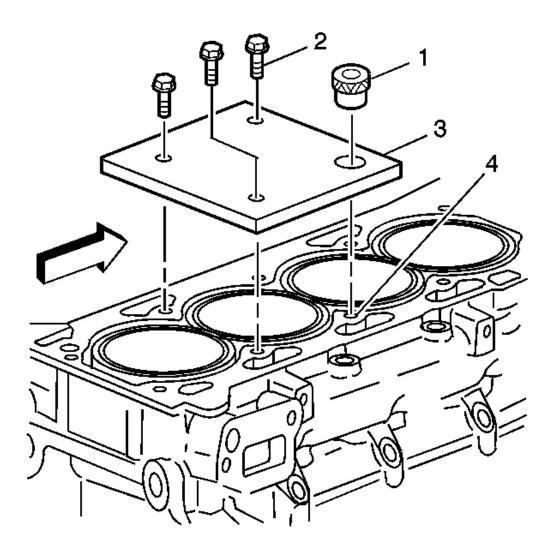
View Of Bushing, Fixture Plate, Bolts & Bolt Hole Courtesy of GENERAL MOTORS CORP.
